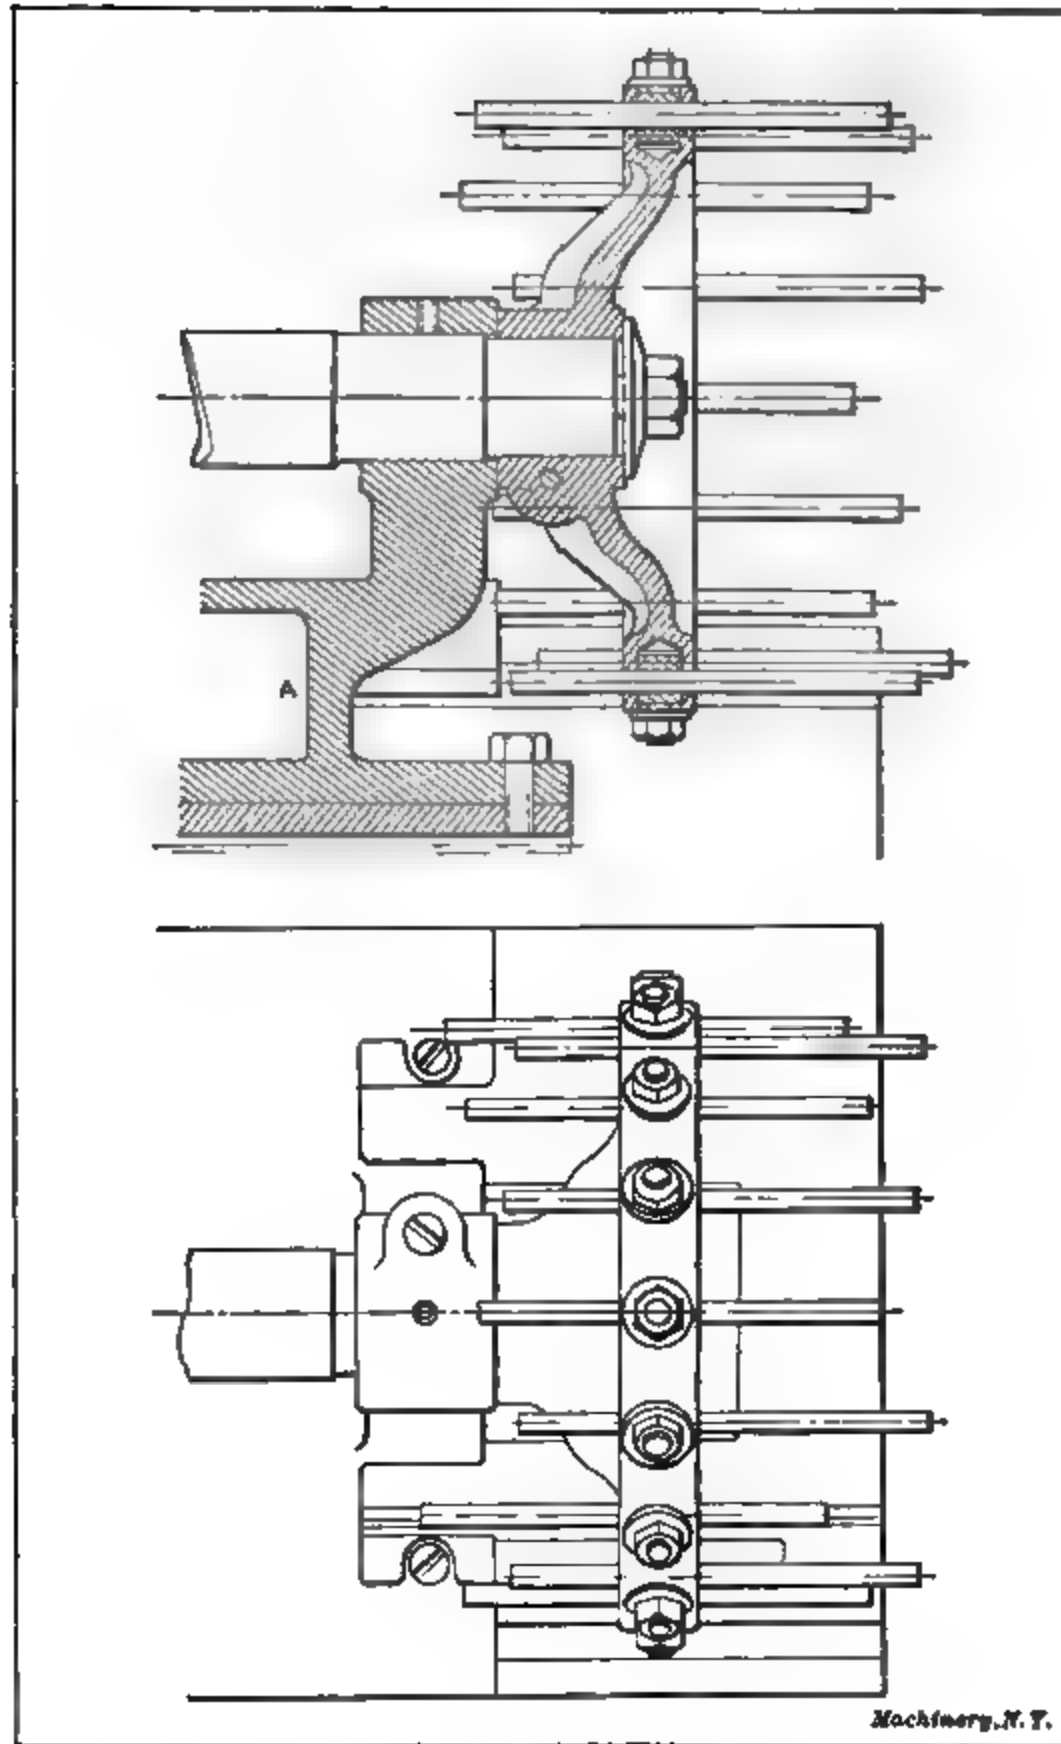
Dead Stops used on a Turret Lathe of German Make
